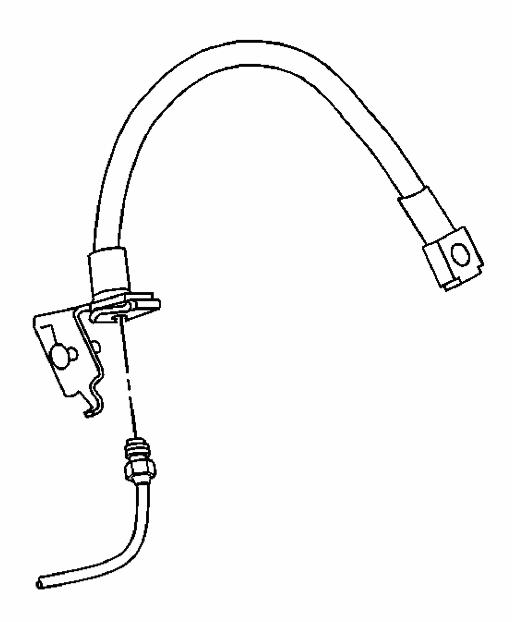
Removing/Installing Rear Brake Hose Courtesy of GENERAL MOTORS CORP.
